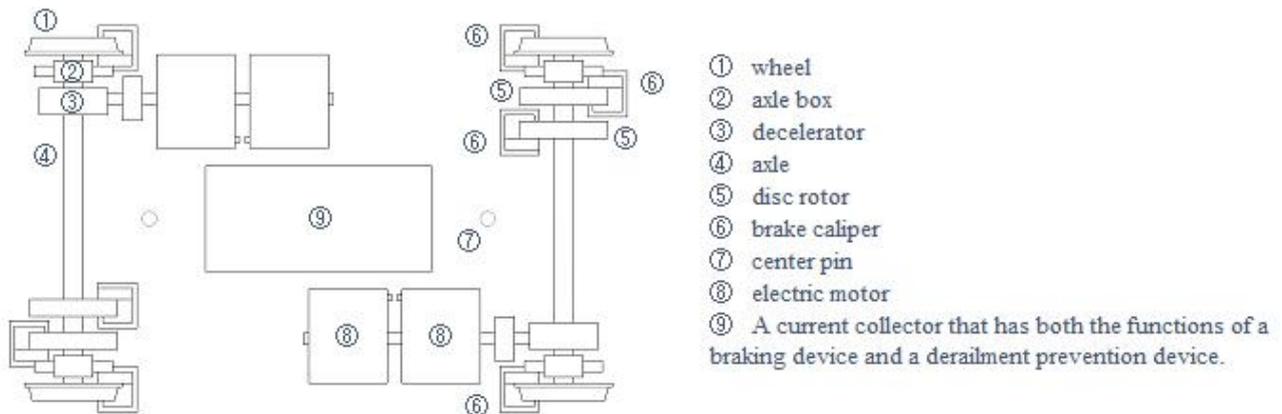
Power vehicle main equipment layout diagram, new standard proposed
